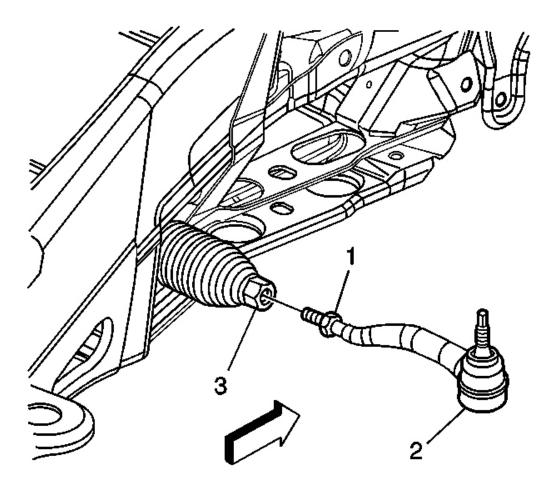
View Of Outer Tie Rod, Inner Tie Rod & Jam Nut Courtesy of GENERAL MOTORS CORP.
